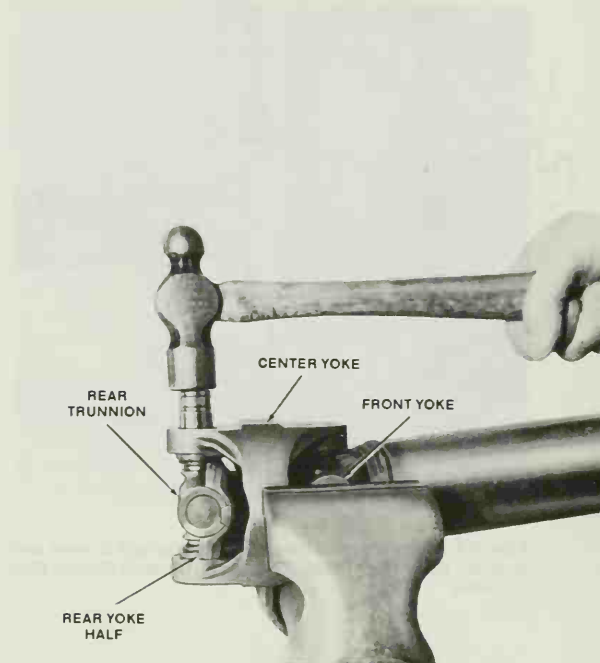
Driving out constant-velocity bearing cups. (General Motors Corporation)
